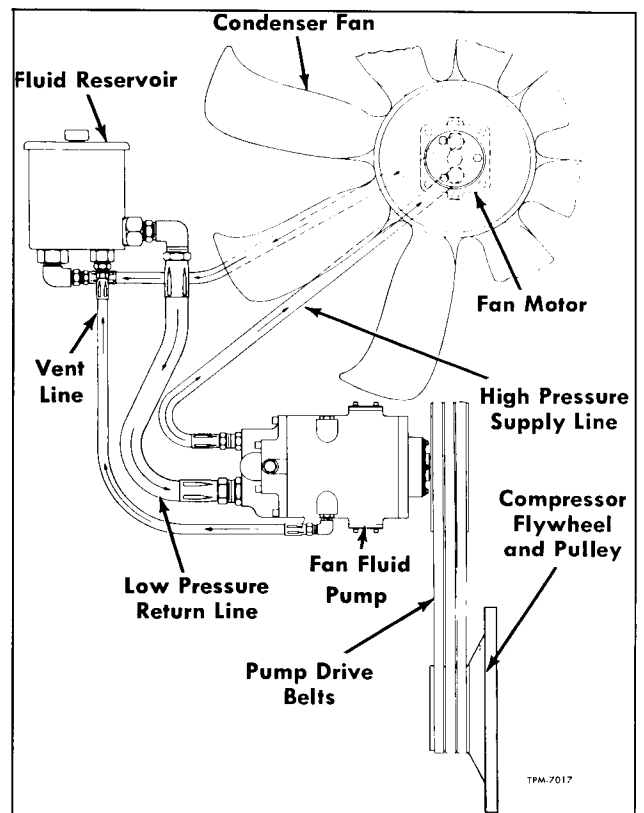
Schematic of Condenser Fan Drive Lines, and Units
